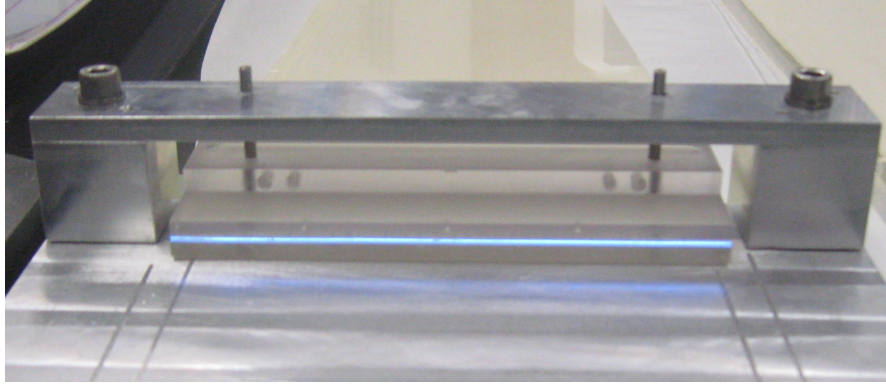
Alignment and gluing of the second end-piece in the gluing jig.
